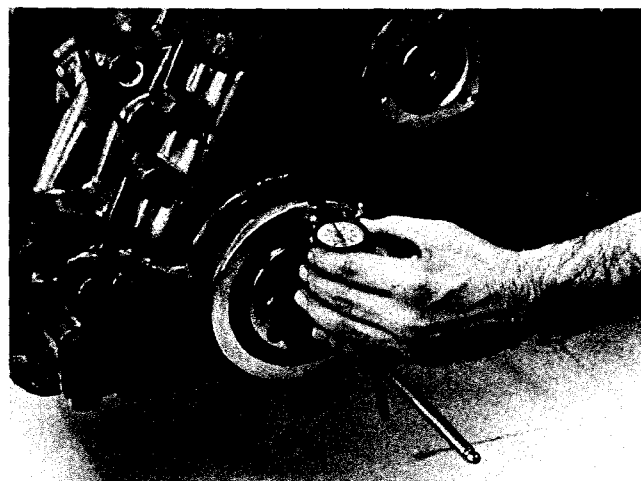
, (N114265). Checking concentricity of crank seal bore
